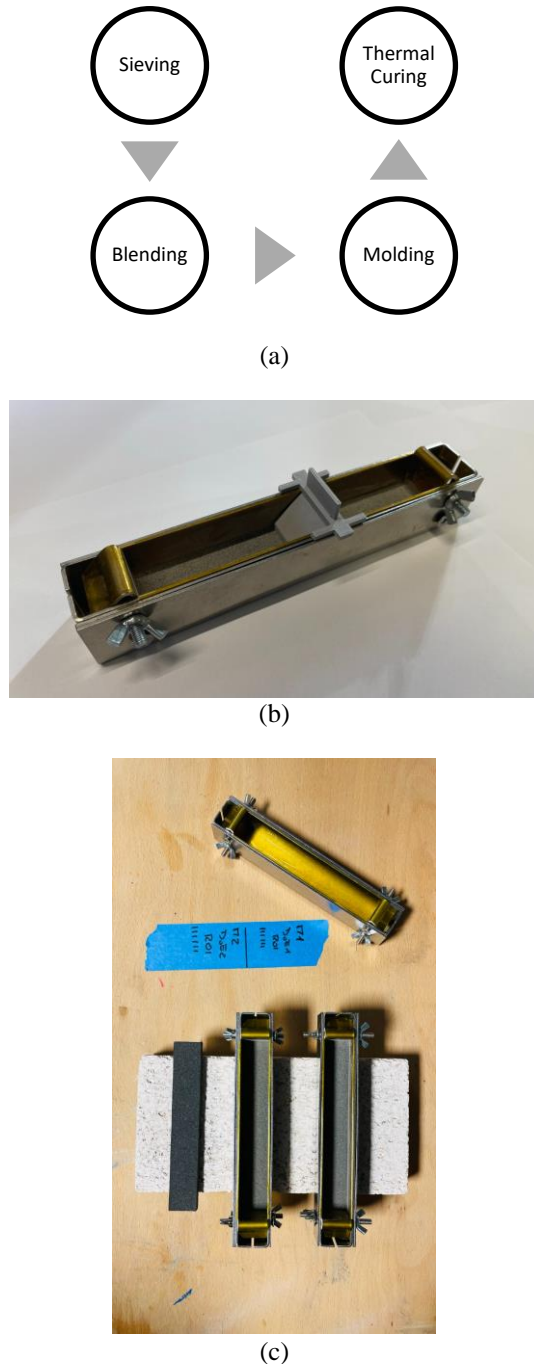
Bricks preparation: (a) schematic of the manufacturing process; (b) moulding assembly for the bending test specimen; (c) view of the moulded specimen and the ongoing process
